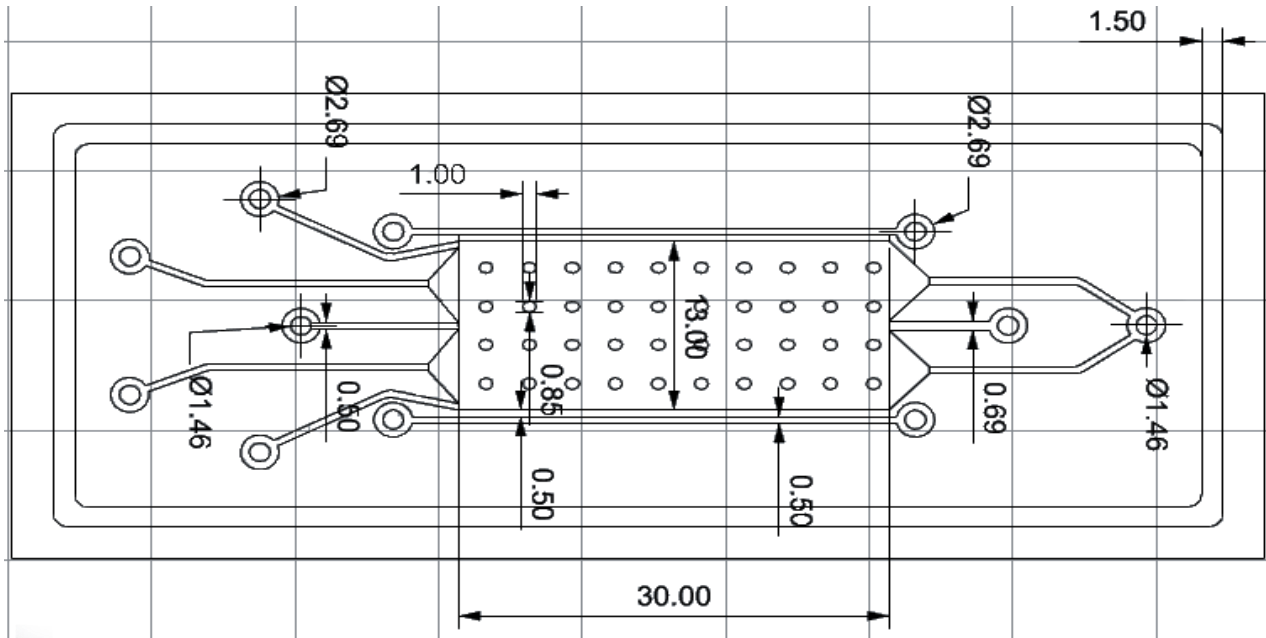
2D mechanical draw of the μ FFE. In particular, all the geometrical nominal CAD dimensions are represented by employing a mm scale (see Tab. 2.1).
